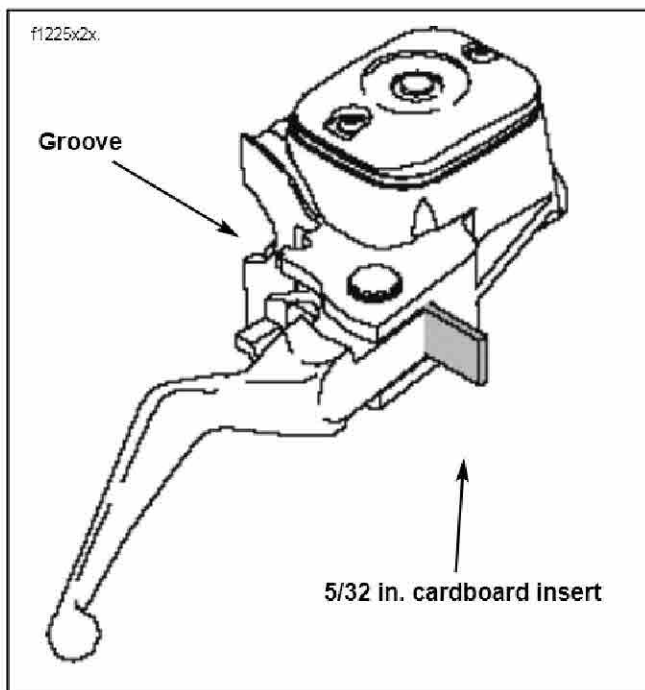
Install Cardboard Insert Before Installing Master Cylinder Assembly
